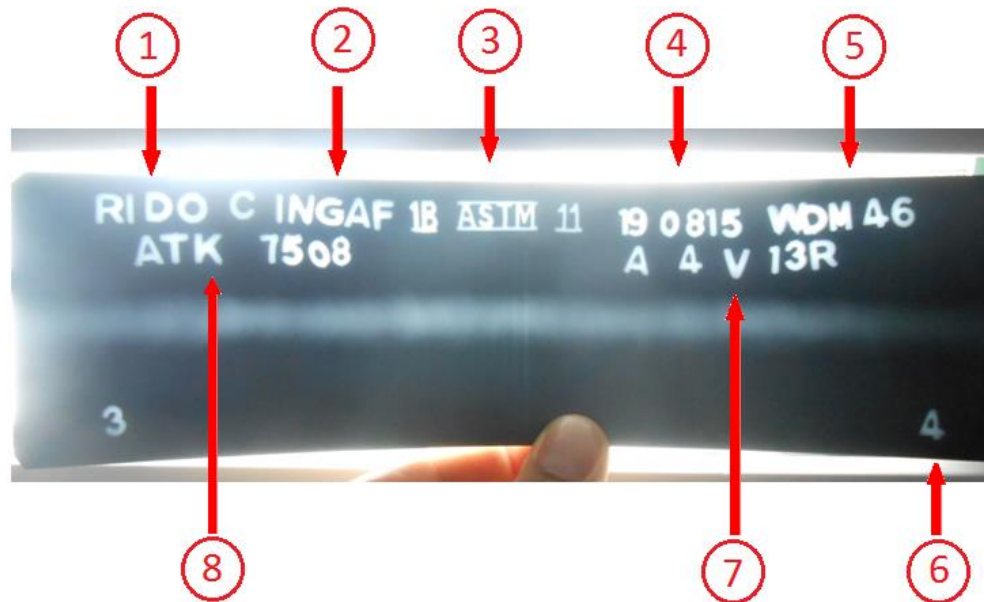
EXAMPLE OF A RADIOGRAPHIC FILM TAKEN ON A TANK WELD
